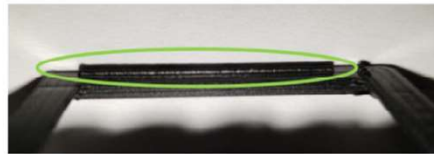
Removed Wall Structure showing Full ABS Filling of 0.8 mm PCB Grooves using 0.8 mm Diameter Extrusion Nozzle and Parameters in Table 2
